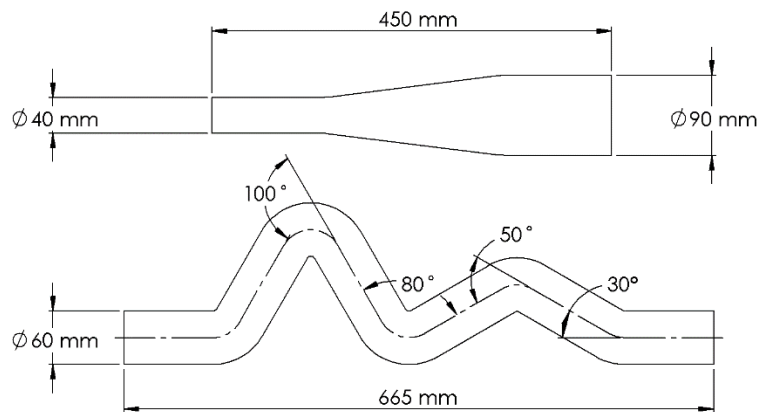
A schematic showing the geometry and dimensions of the two main tubes used to evaluate RollerBall.
